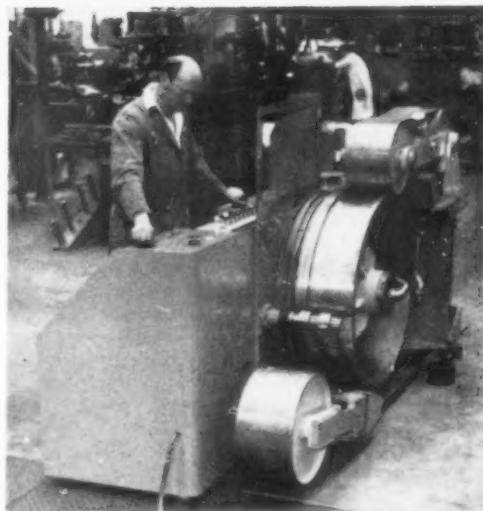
Rotary casting machine Mk. III. To the left of the operator, electronic control push buttons and indicator lamps. On his right pneumatic controls for tensioning and lifting of the mild-steel belt. Very clearly shown is the groove in the rim of the casting wheel, which is covered by the endless mild-steel belt, so forming the mould for the cast strip. The shown machine is a right-hand design which means that the molten metal is fed from the right-hand side through a launder, ending in a fishtail, to the casting wheel and poured into the groove at the point where the mild-steel belt is held on to the rim. Water sprays are mounted inside the wheel rims and behind the same (not to be seen in the photograph as covered by the wheel itself) and cool the aluminium rapidly but steadily. The solidifying of the metal starts immediately after coming into contact with the casting wheel and the mild-steel band and takes place over a length of approximately 24 in. After this, the strip is completely solidified and when leaving the wheel has a temperature of approximately 500° C.
